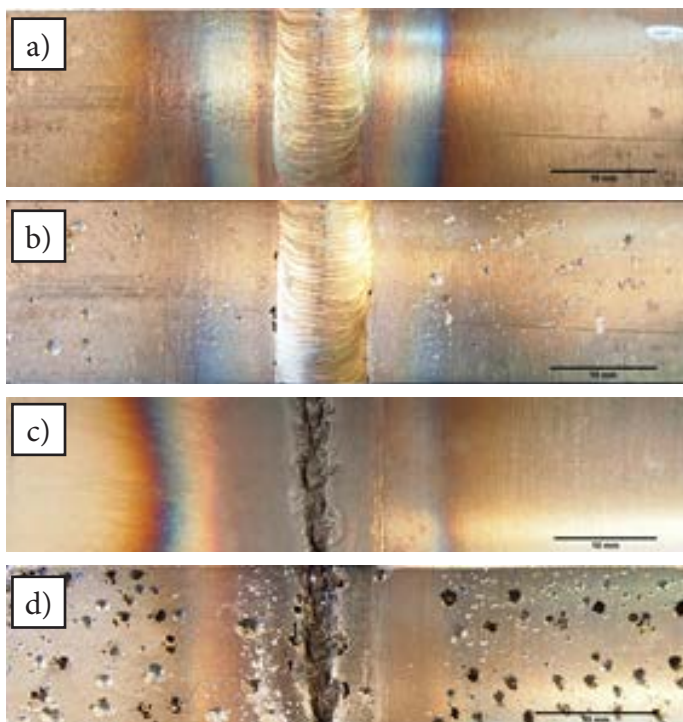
Specimen no. 4, made without the use of forming gas on the weld root side and where temper colours were not removed: a) weld face before the corrosion resistance test, b) weld face after the corrosion resistance test, c) weld root before the corrosion resistance test, d) weld root after the corrosion resistance test
